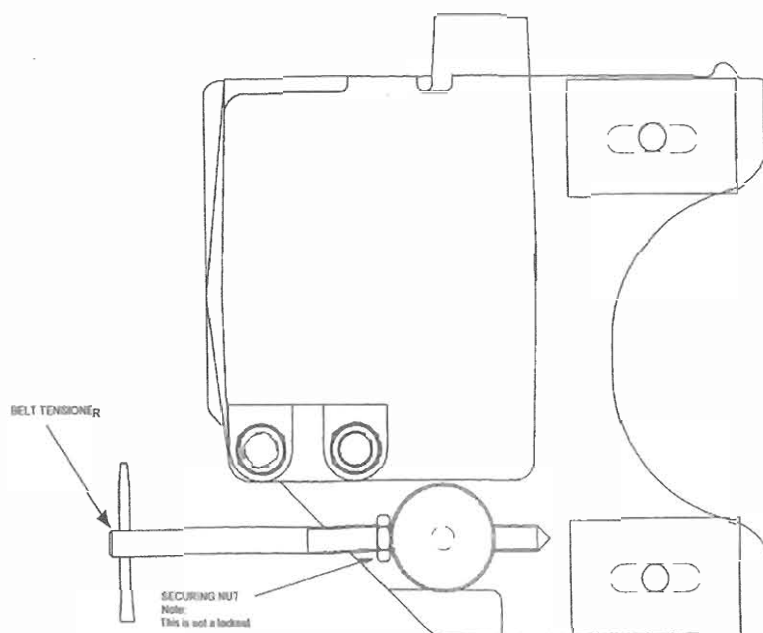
View of V Belt Tensioner Fitted to JHPU
